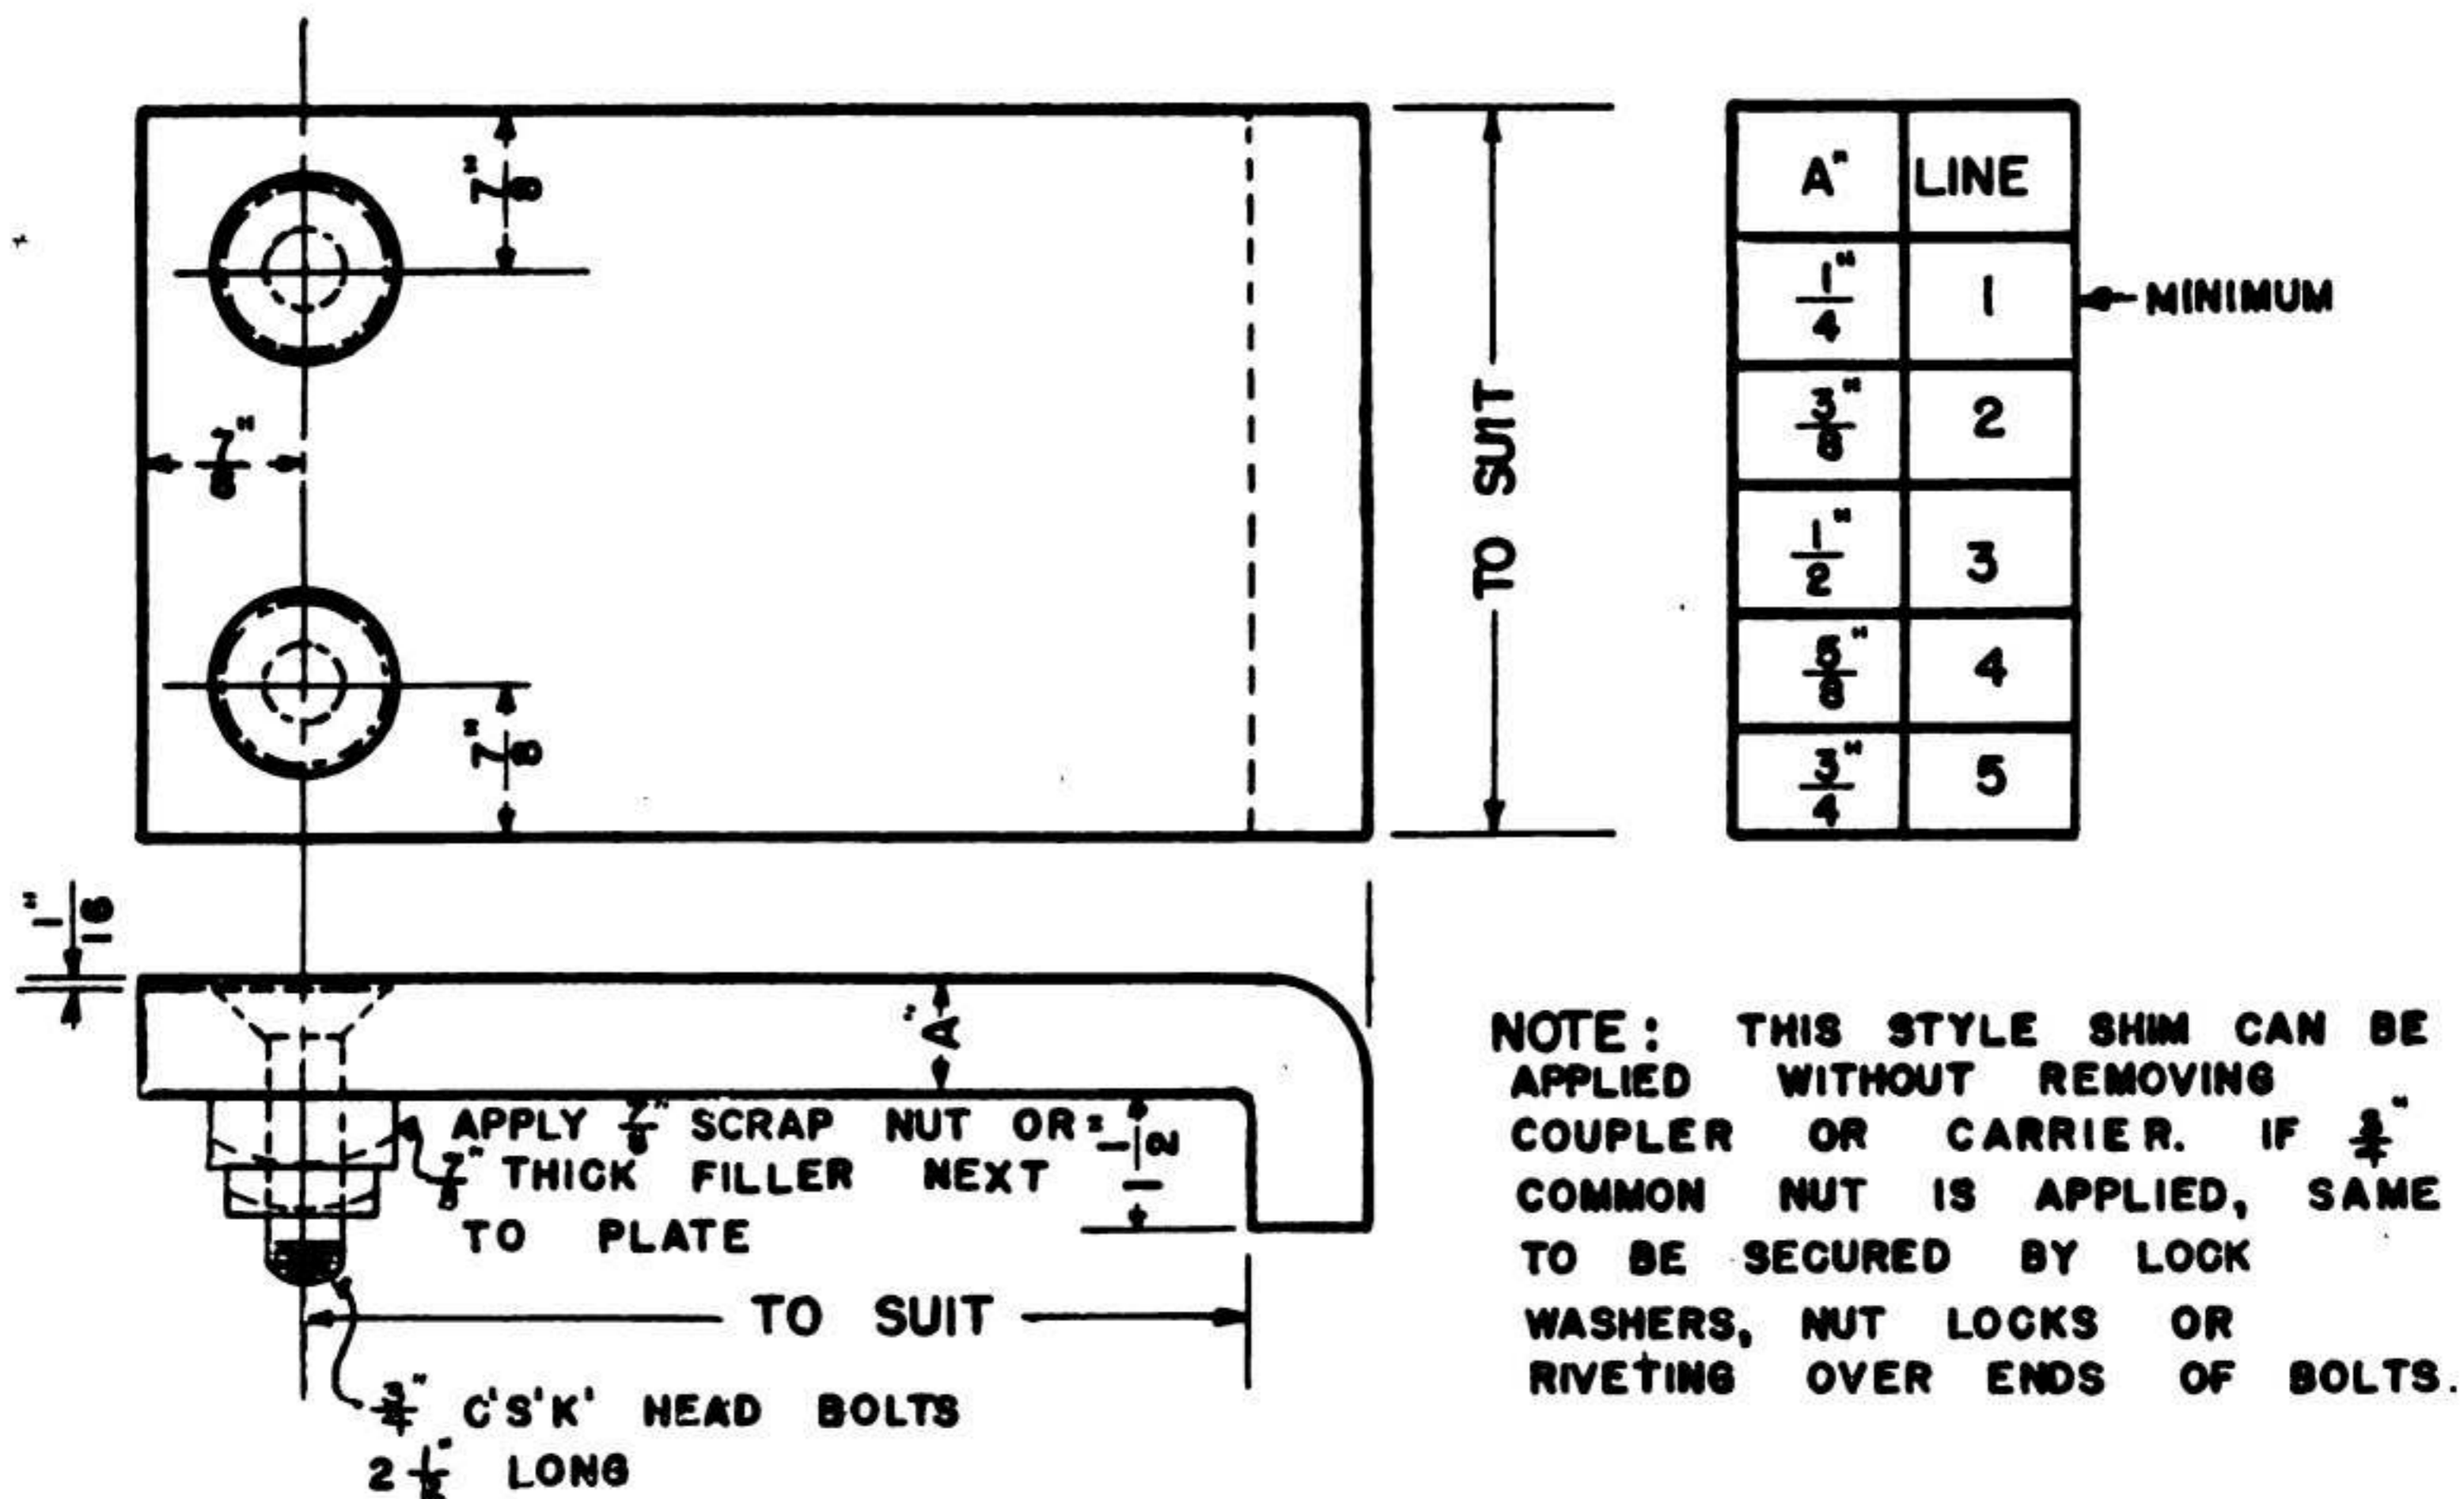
This style coupler shim can be applied without removing coupler or carrier, if 3/4-inch common nut is applied and secured by lock washers, nut locks, or riveting over ends of bolts.
